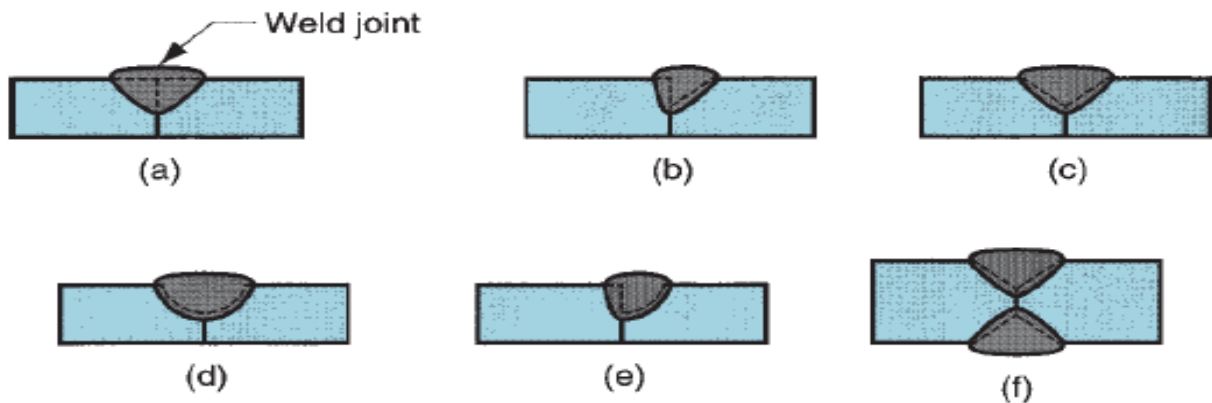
Some typical groove welds: (a) square groove weld, one side (b) single bevel groove weld (c) single V-groove weld (d) single U-groove weld (e) single J-groove weld (f) double V-groove weld for thicker sections. Dashed lines show the original part edges.
